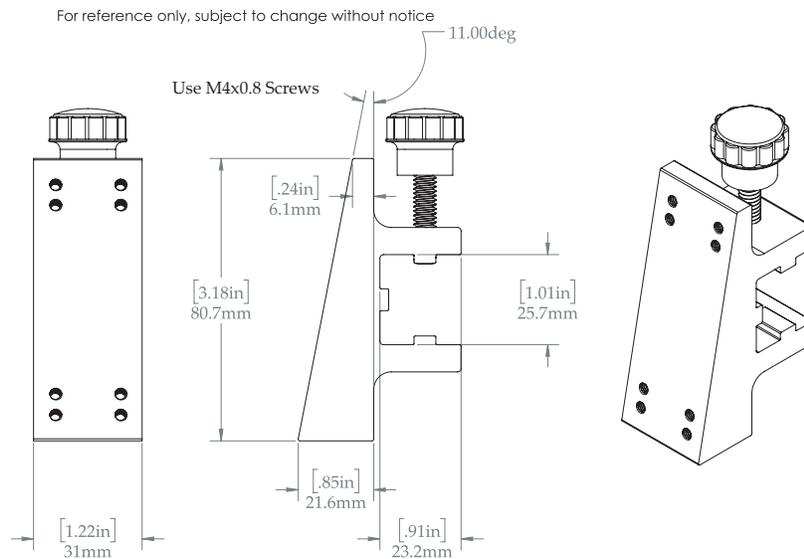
Angled 1" Sensor Mounting Bracket for use with 1" extrusion or 25 mm extrusion
